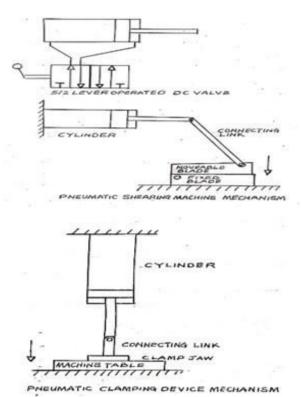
Pneumatic cylinder extension for clamping and cutting operations.
